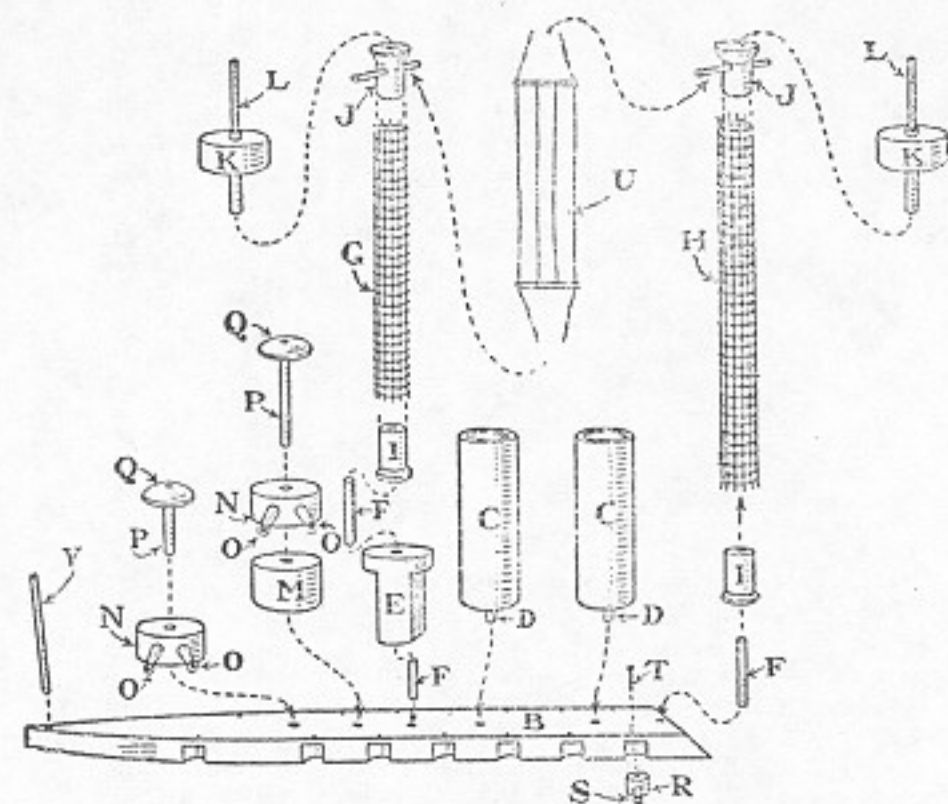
Detail Showing How the Superstructure-Deck, Funnels, Masts, Fighting-Tops, Gun-Turrets, and Wireless Aerial are Assembled
